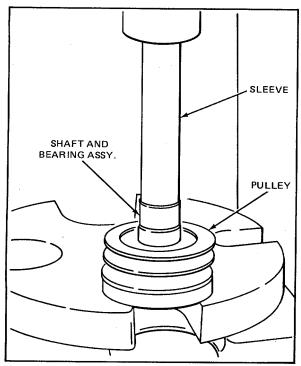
Installing Shaft and Bearing Assembly in Idler Pulley
